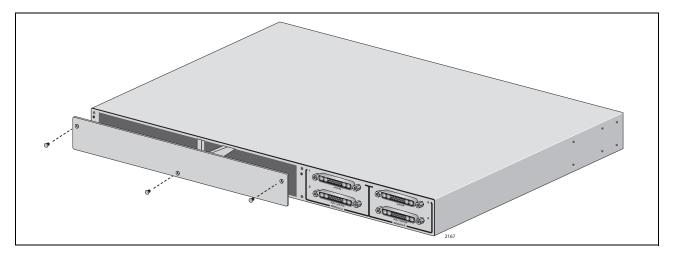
Removing the Blank Shipping Panel from the Back Panel
